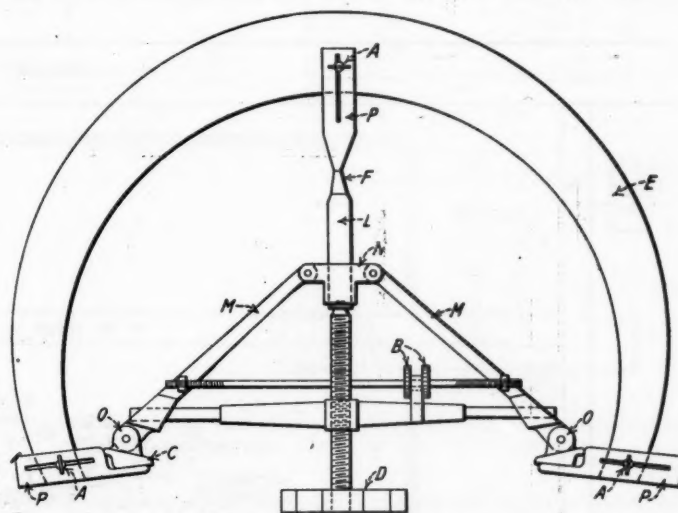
Caliper and Gage for Laying Out the Shoulder Pit on the Driving Box Brasses
